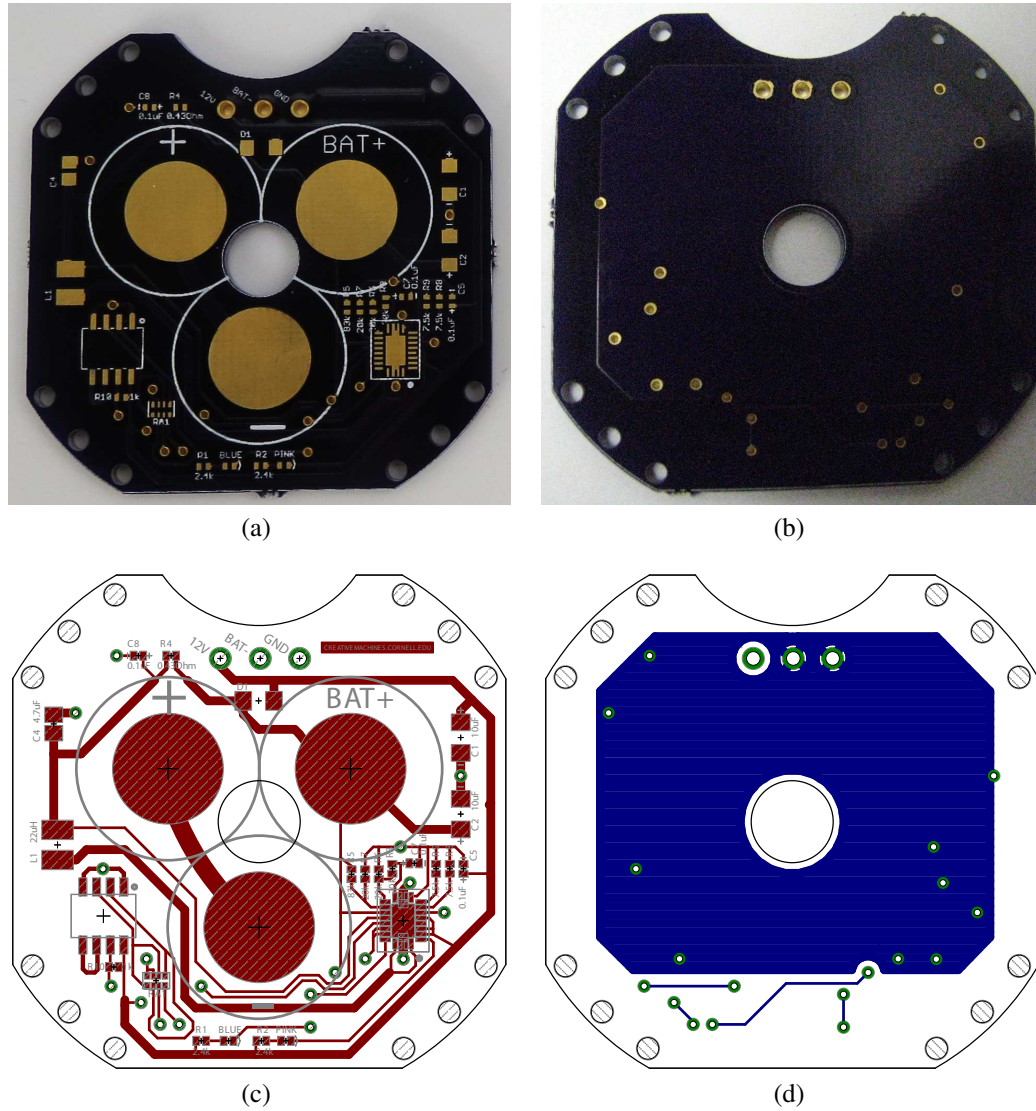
Battery charge controller PCB. (a) Top view of unassembled PCB. (b) Bottom view of PCB. (c) Schematic drawing top. (d) Schematic drawing bottom.
